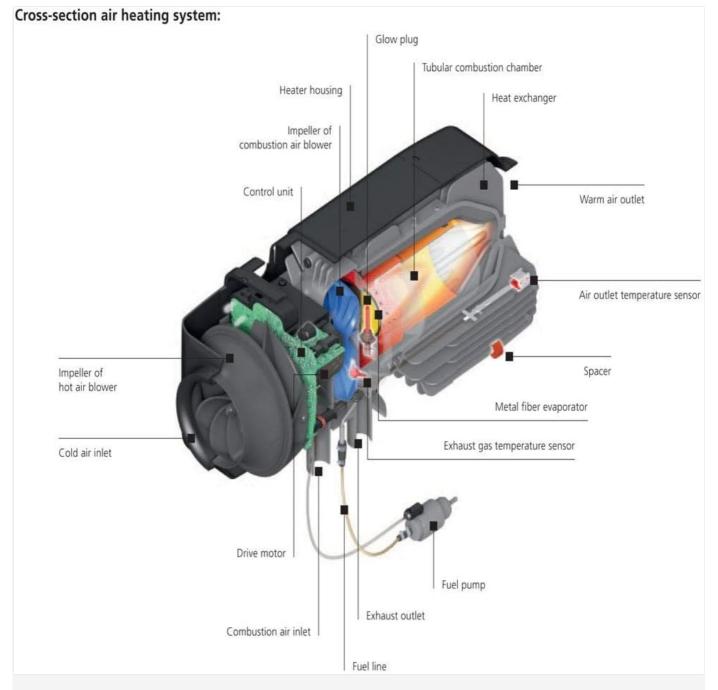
Cross-section view of the air heating system, illustrating key internal components such as the glow plug, combustion chamber, heat exchanger, impellers, control unit, and various sensors.
